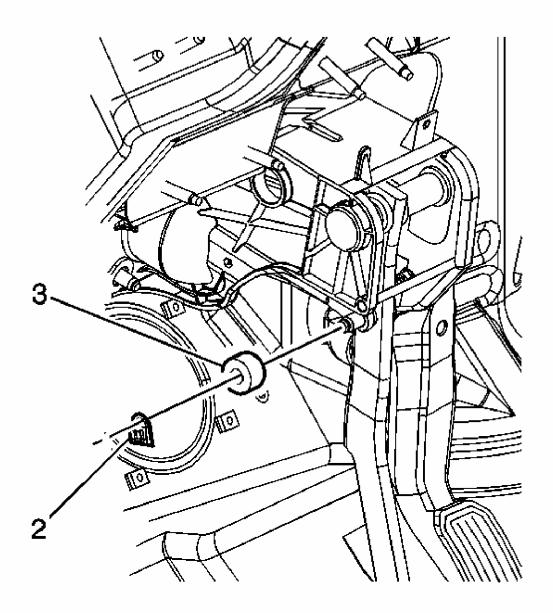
Identifying Brake Pedal Assembly Clevis Pin Courtesy of GENERAL MOTORS CORP.
